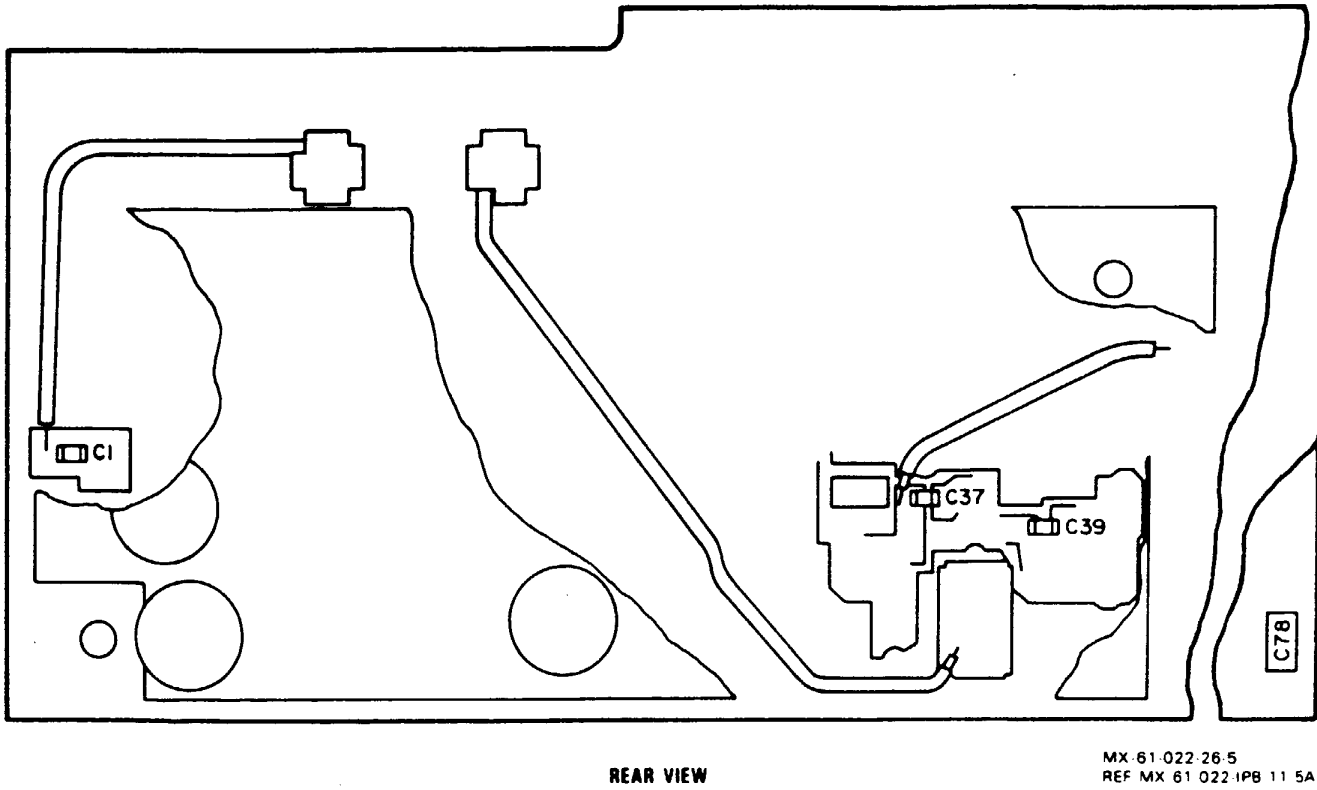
Main Receiver Assembly A1A1A4 Component and Test Point Location Diagram (Sheet 5 of 5)
